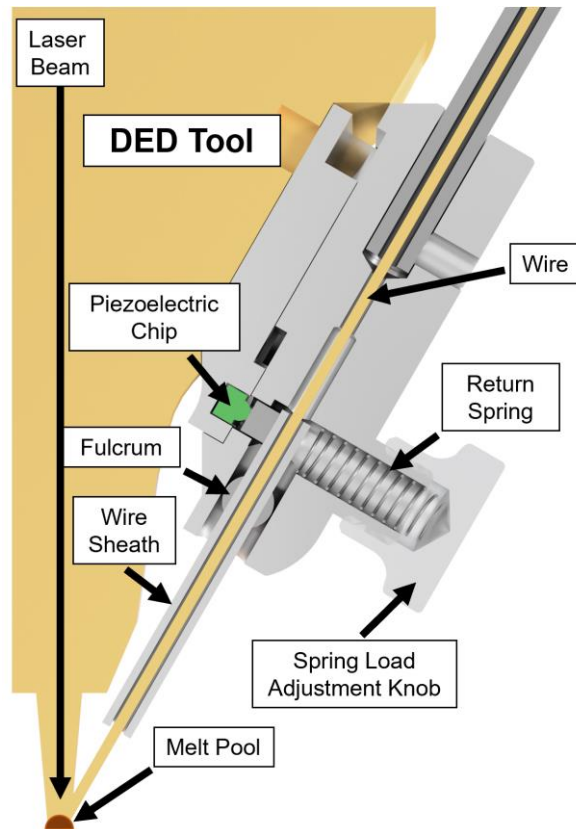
A cross-section schematic of the ultrasonic wire feed nozzle mounted on a representative DED laser tool.
